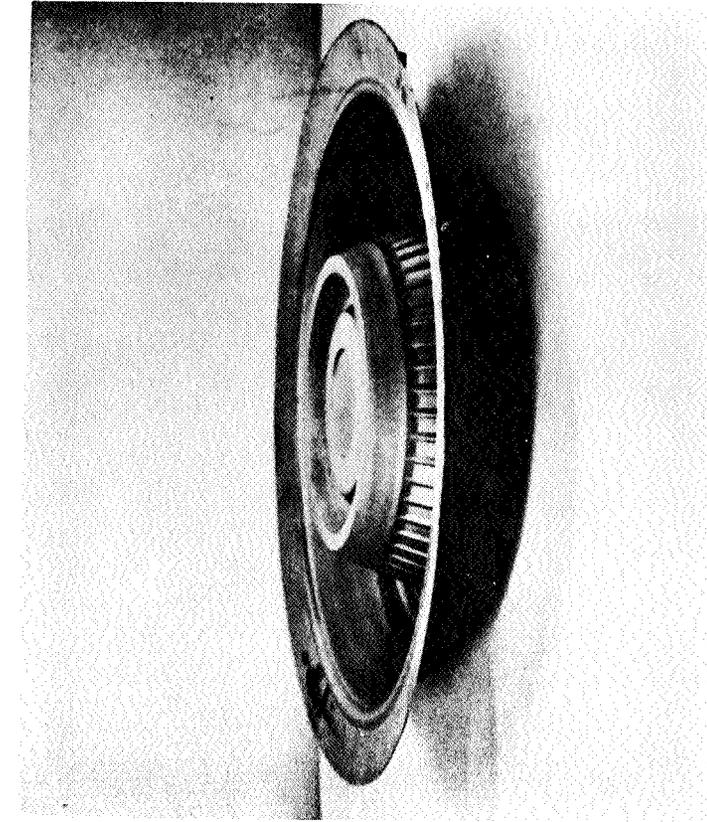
EXPLOSIVELY FORMED PROTOTYPE WHEEL COVER FROM TYPE 301 STAINLESS STEEL AND DIE. THE DIE IS ON THE LEFT
